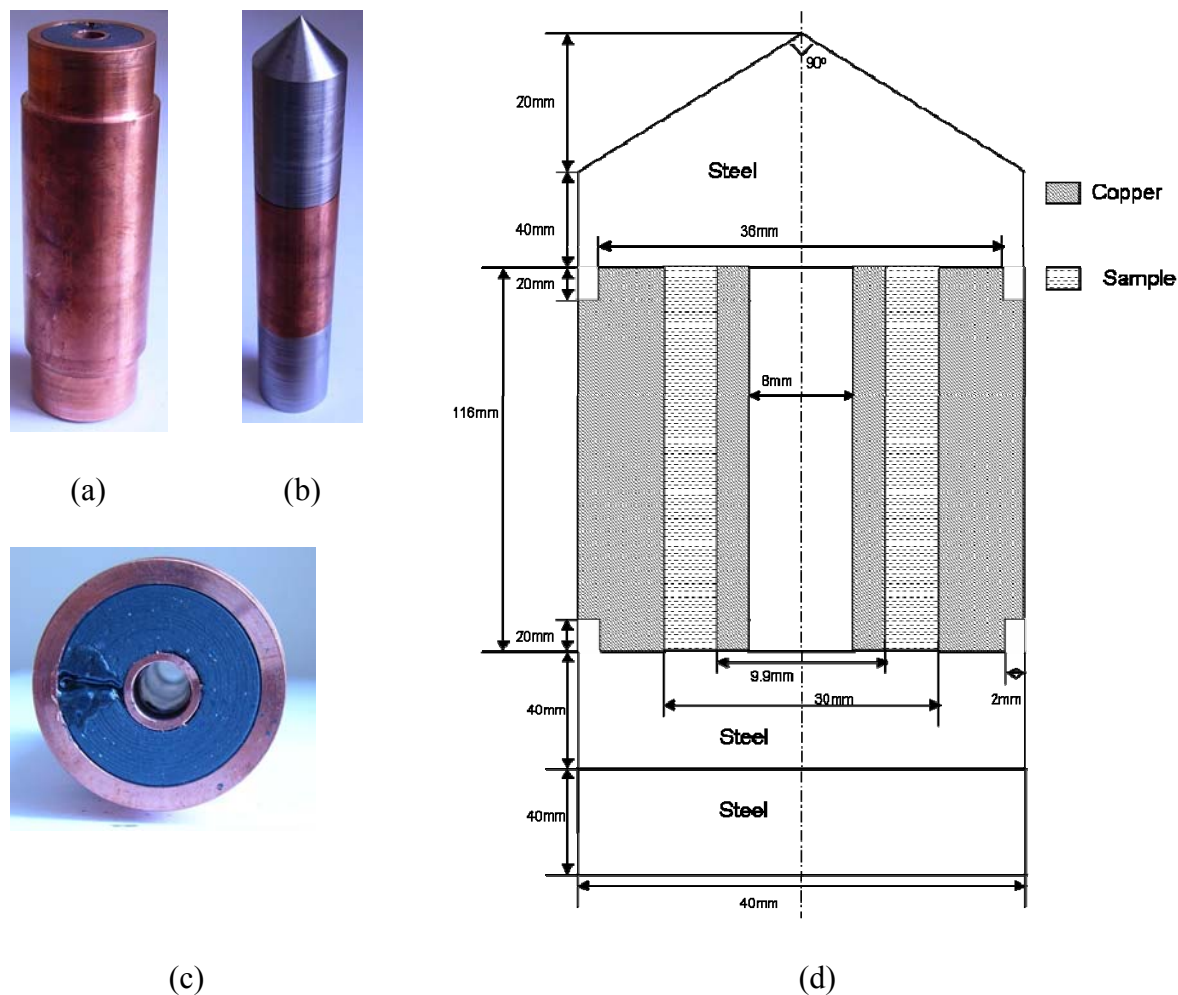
Sample for explosively driven TWC test: (a) the tubular sample inserted between two copper tubes, inner stopper tube and driving outside tube; (b) the whole assembly with bottom (including momentum trap steel cylinder) and top steel plugs attached; (c) the cross-section shows the inner copper stopper and the outer copper driver; (d) the geometry of the assembly.
